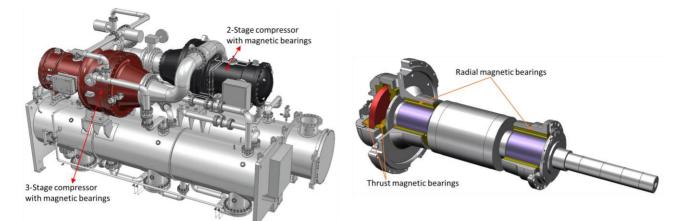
LG Electronics 3000 USRT oil-free turbo chiller with two compressors operated in series (left), and schematic view of rotor-bearing structure for 3-stage compressor (right)
